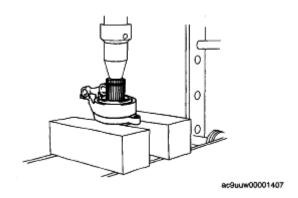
Pressing Joint Shaft Courtesy of MAZDA MOTORS CORP.
